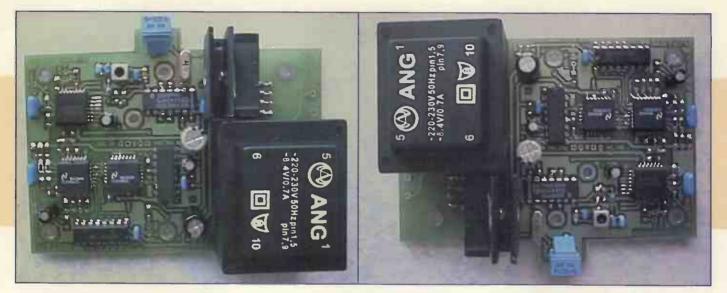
The PCB of the SDIT270. Most of the components are surface mount, so some experience with soldering such devices is necessary.
